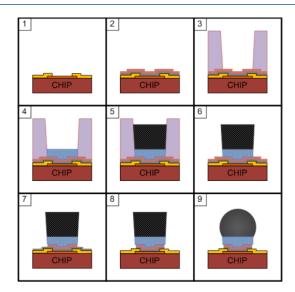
The process flow of a solder bumping process using the electroplating technique [33], [34].
